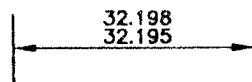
Limits of size with upper and lower dimension (Bilateral tolerancing)
